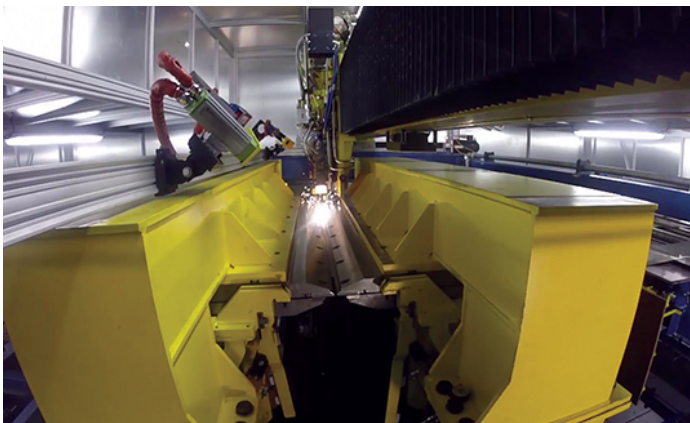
The new Danieli Laser welder features high energy-efficient fiber laser technology. All head and tail-end cutting, notching, and hole punching is performed by the laser welder.
